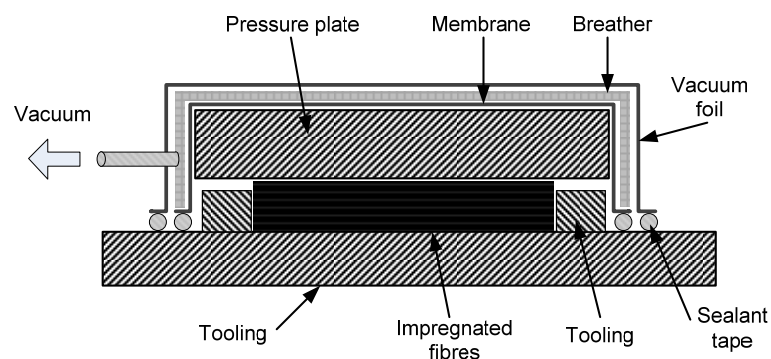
The hand layup assembly used for producing the fibre-reinforced composite test plates
